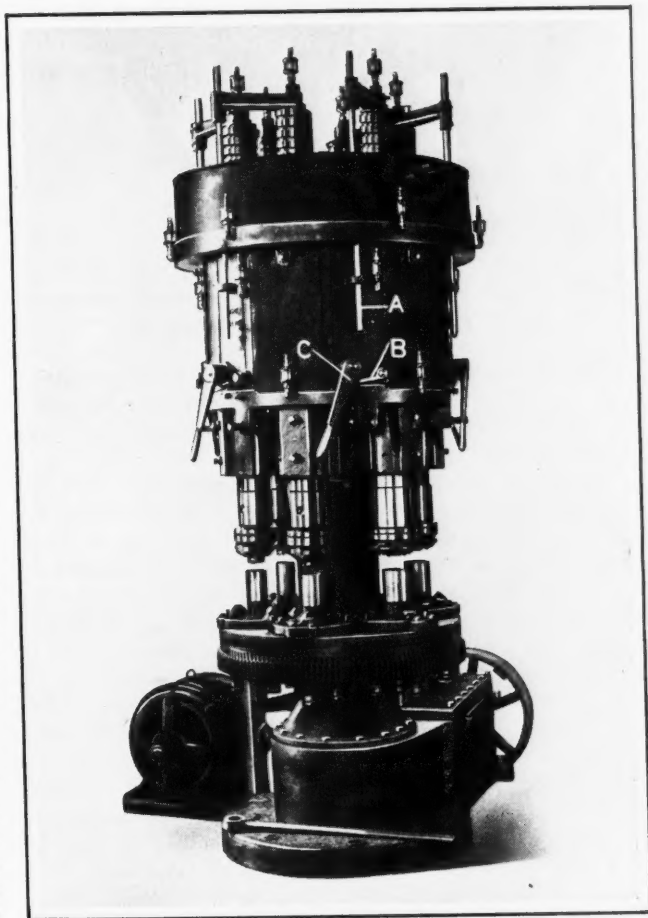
Davis & Thompson Six-spindle Turning and Boring Machine
